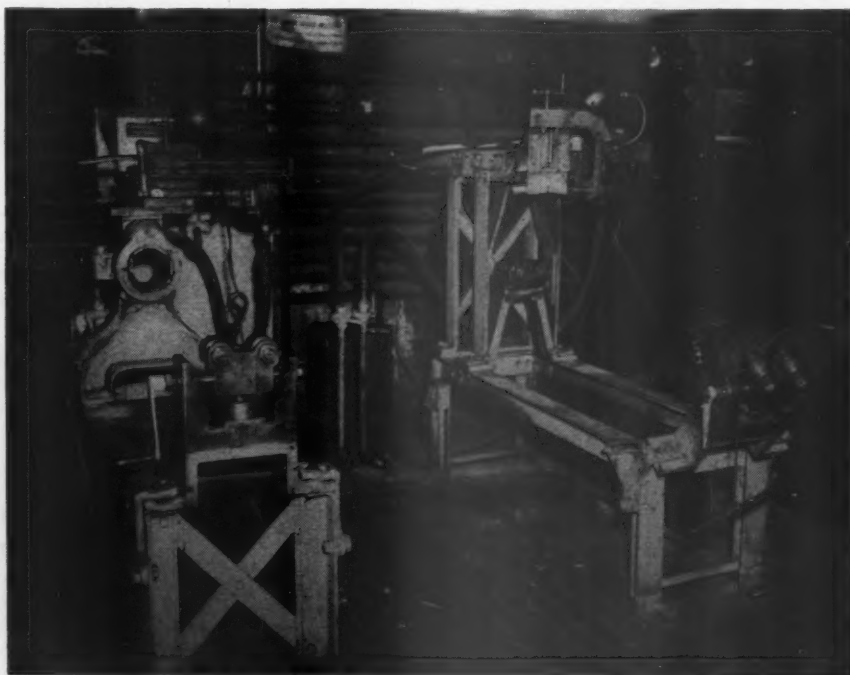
(left)—End housing cap screws are removed with an impact wrench. Fig. 5 (right)—Machine for removing armature from motor frame. Hydraulic jack at right is being used to remove end housing by applying pressure on center and pulling housing with two wire cables.
